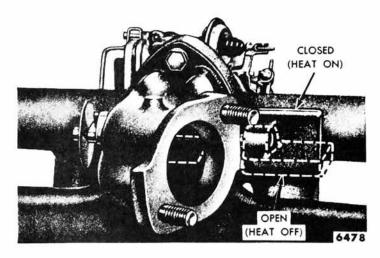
Exhaust Control Valve—6-Cylinder Engine
